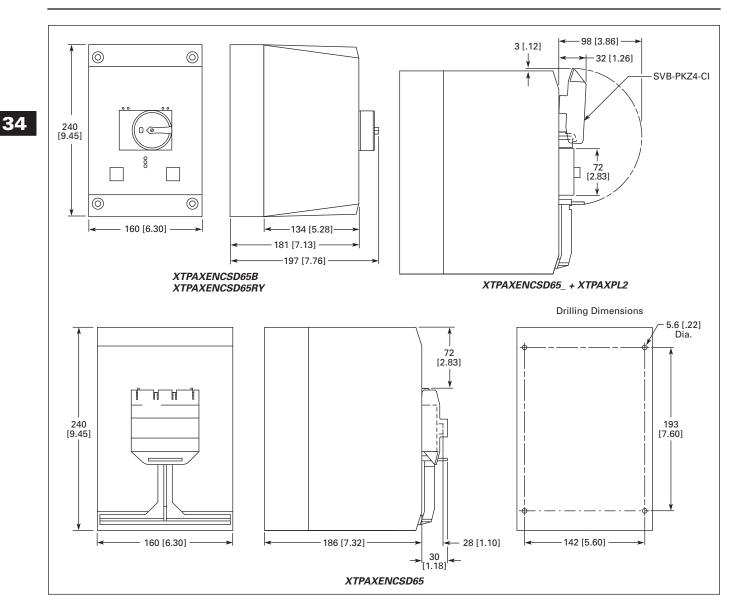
Insulated Enclosures for Surface Mounting of XTPR...D Manual Motor Protectors (Approximate Dimensions in mm [in])
